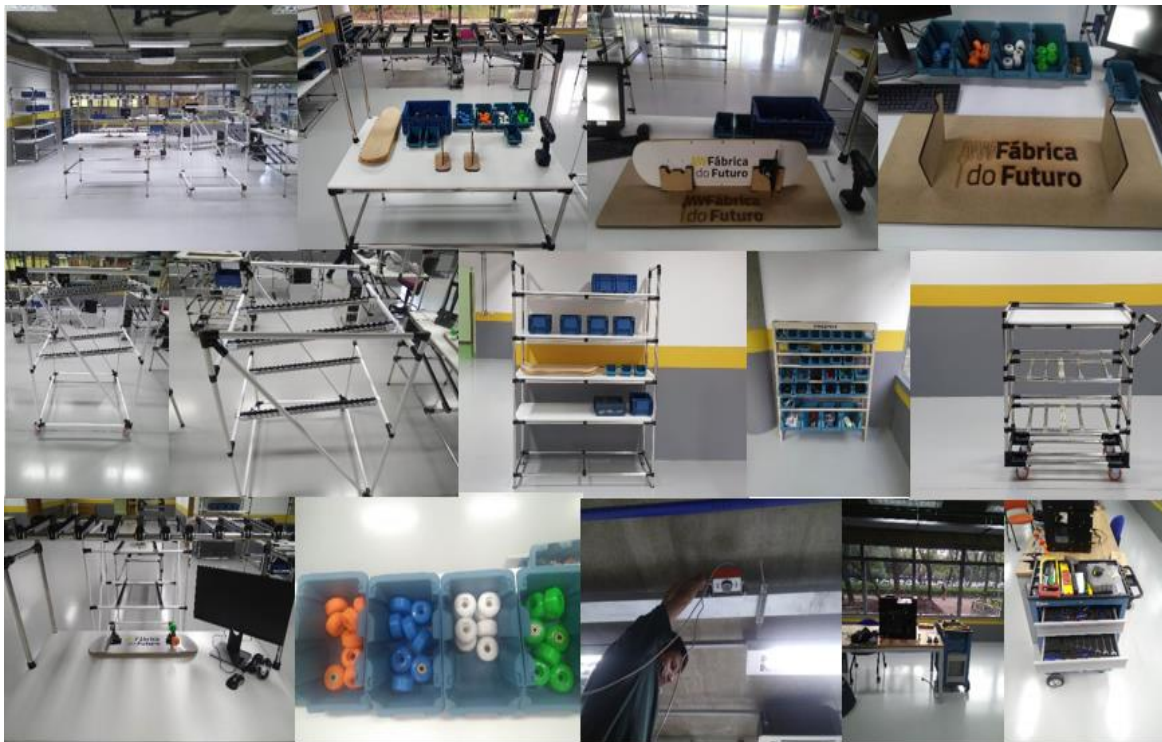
Initial Shop Floor Plan of Fabrica do Futuro
